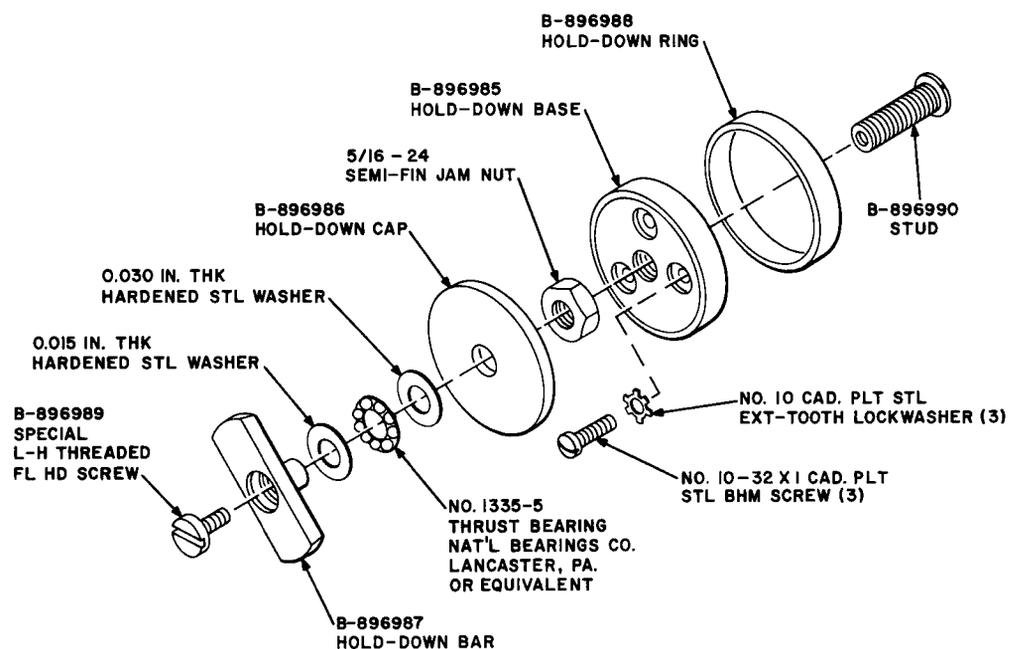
KS-19125, L101 (ASA) Hold-Down Knob—Exploded View
